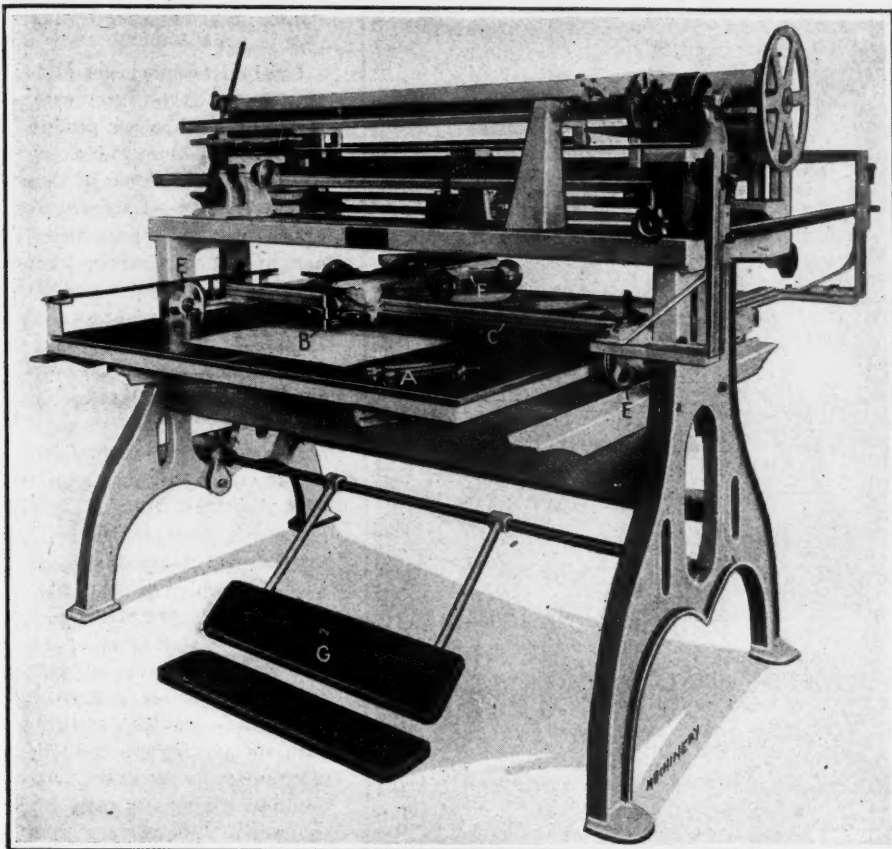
Hand-operated Multiple Graduating Machine built by John Hope & Sons
